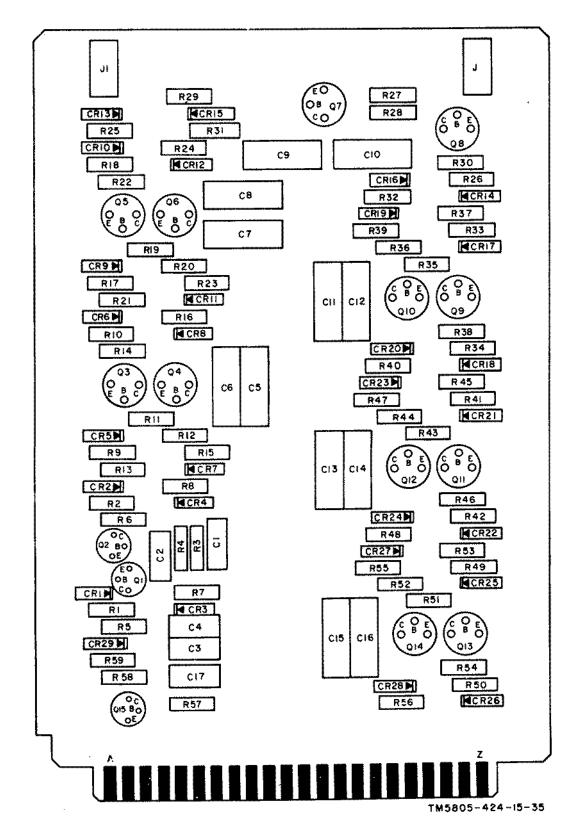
Printed-circuit card assembly A2 (PC 80034100), component location diagram.
